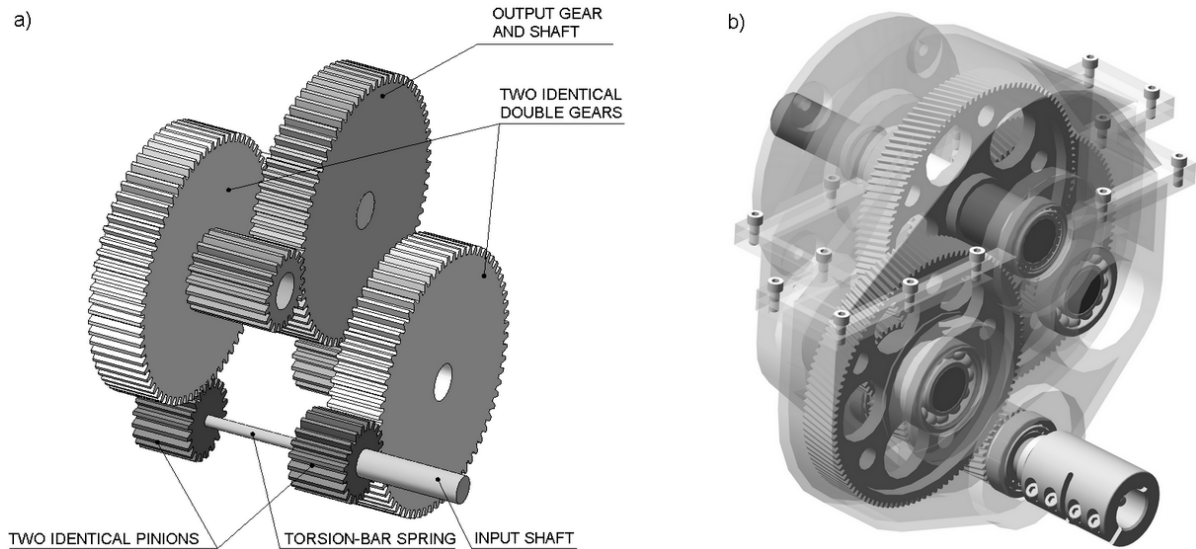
a) anti-backlash gear assembly, b) prototype design of the backlash-free gearbox
